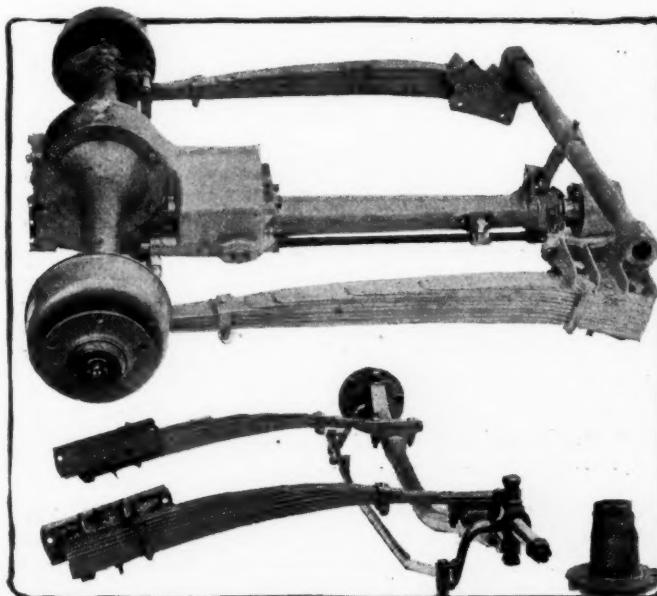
On top—Rear axle of Wolseley Stellite car with worm gear reduction of 38 to 7. This complete rear axle unit is very easily detachable
